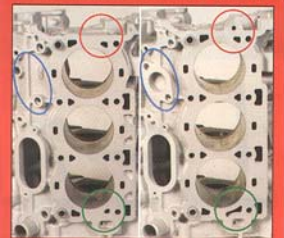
On the left, F5DE (the "without" block), on the right, XW4E or 3W4E (the "with" blocks), with oil feed to right head for VVT if used (red circle); with coolant port flange if used (blue circle); and with expanded coolant flow (green circle).
